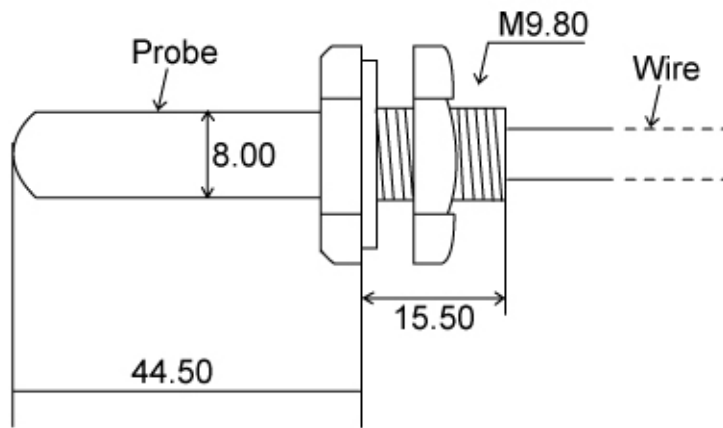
MECHANICAL DRAWING OF MB-SM17115
